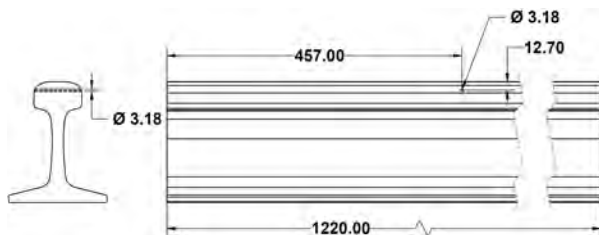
Engineering drawing of the calibration rail specimen (units in mm).
